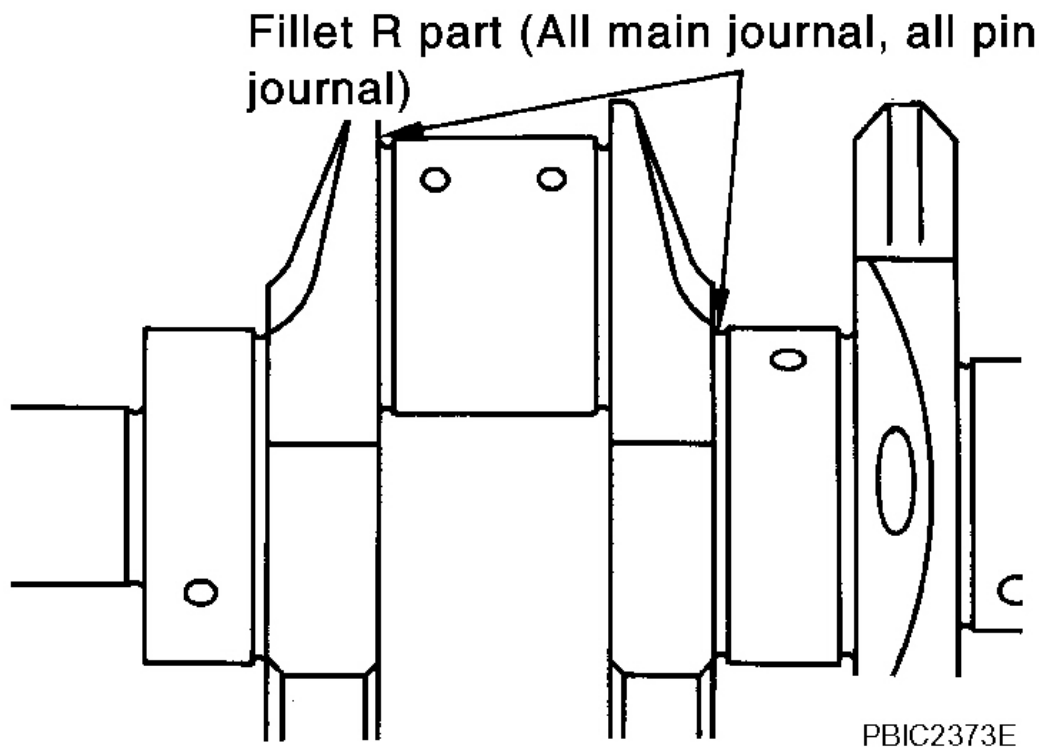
Measuring Main Bearing Inner Diameter With Bearing Installed And Grind Main Journal
